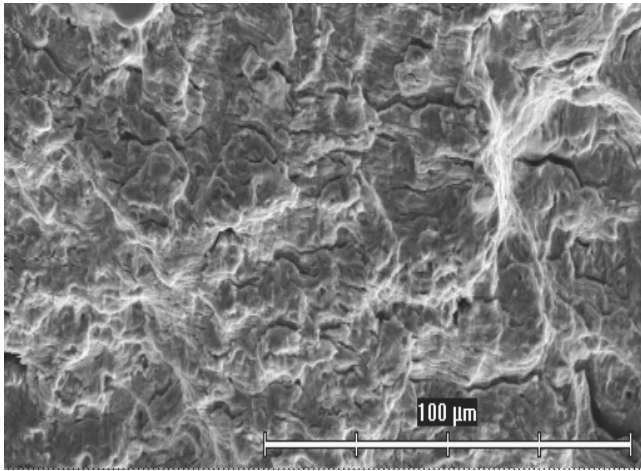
Detail of fracture surface, spec. K30
